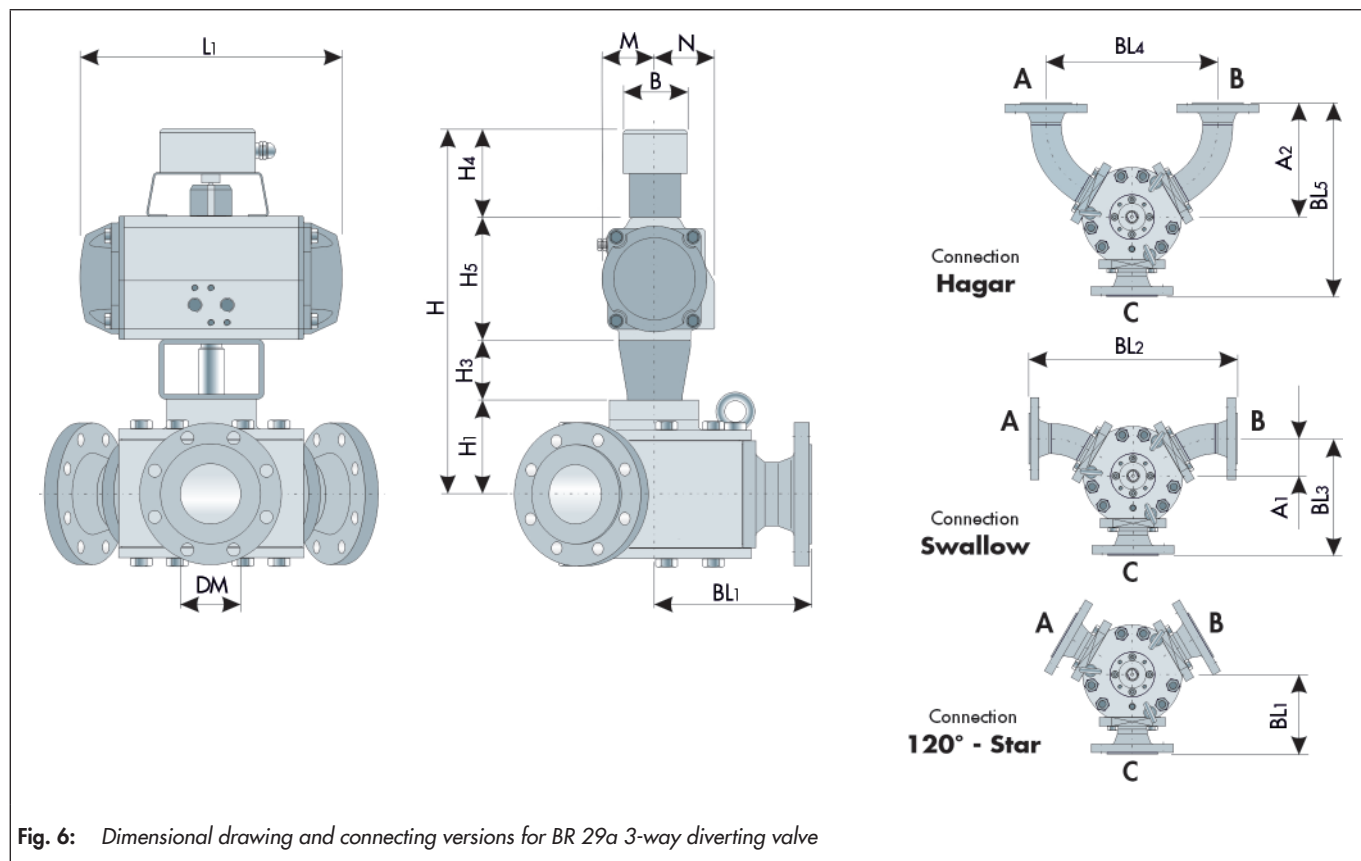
Dimensional drawing and connecting versions for BR 29a 3-way diverting valve
